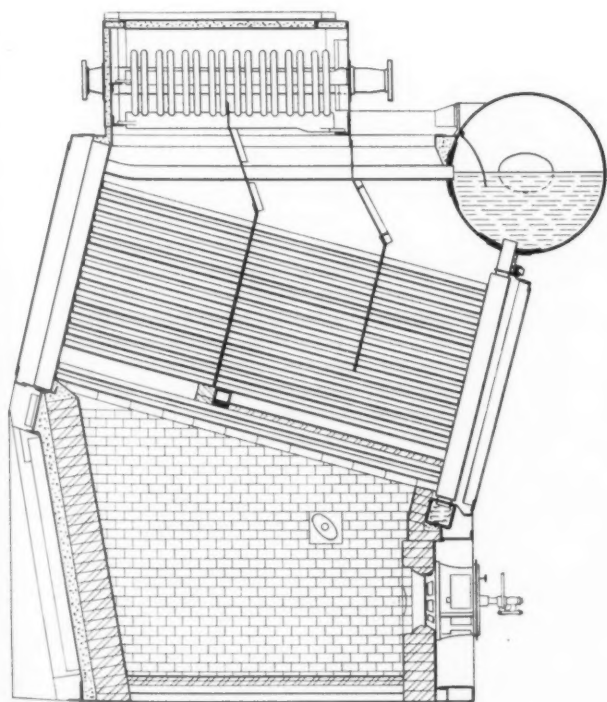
LONGITUDINAL SECTION OF 2-IN-TUBE HEADER-TYPE MARINE BOILER WITH SUPERHEATER
